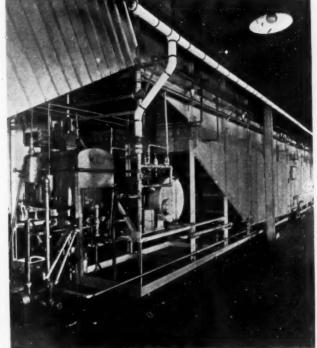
Degreaser equipped with recovery still and storage tank. (Courtesy Detroit Rex Products Co.)
